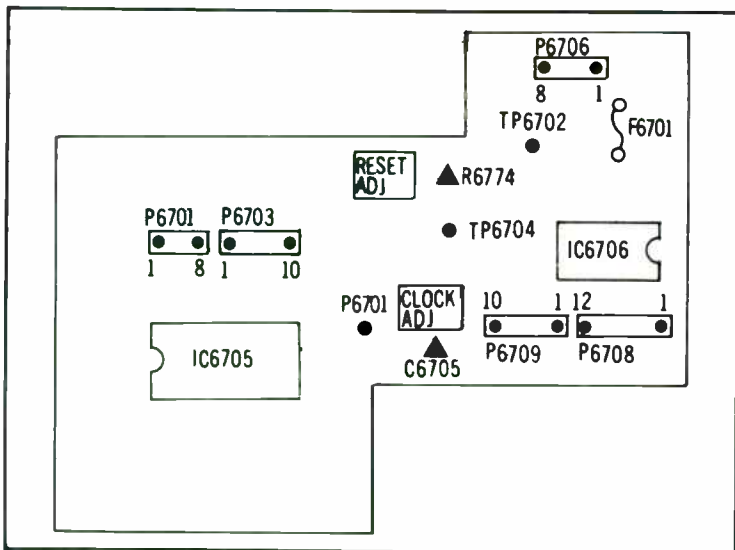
Programmable timer board component side view (courtesy of General Electric).
